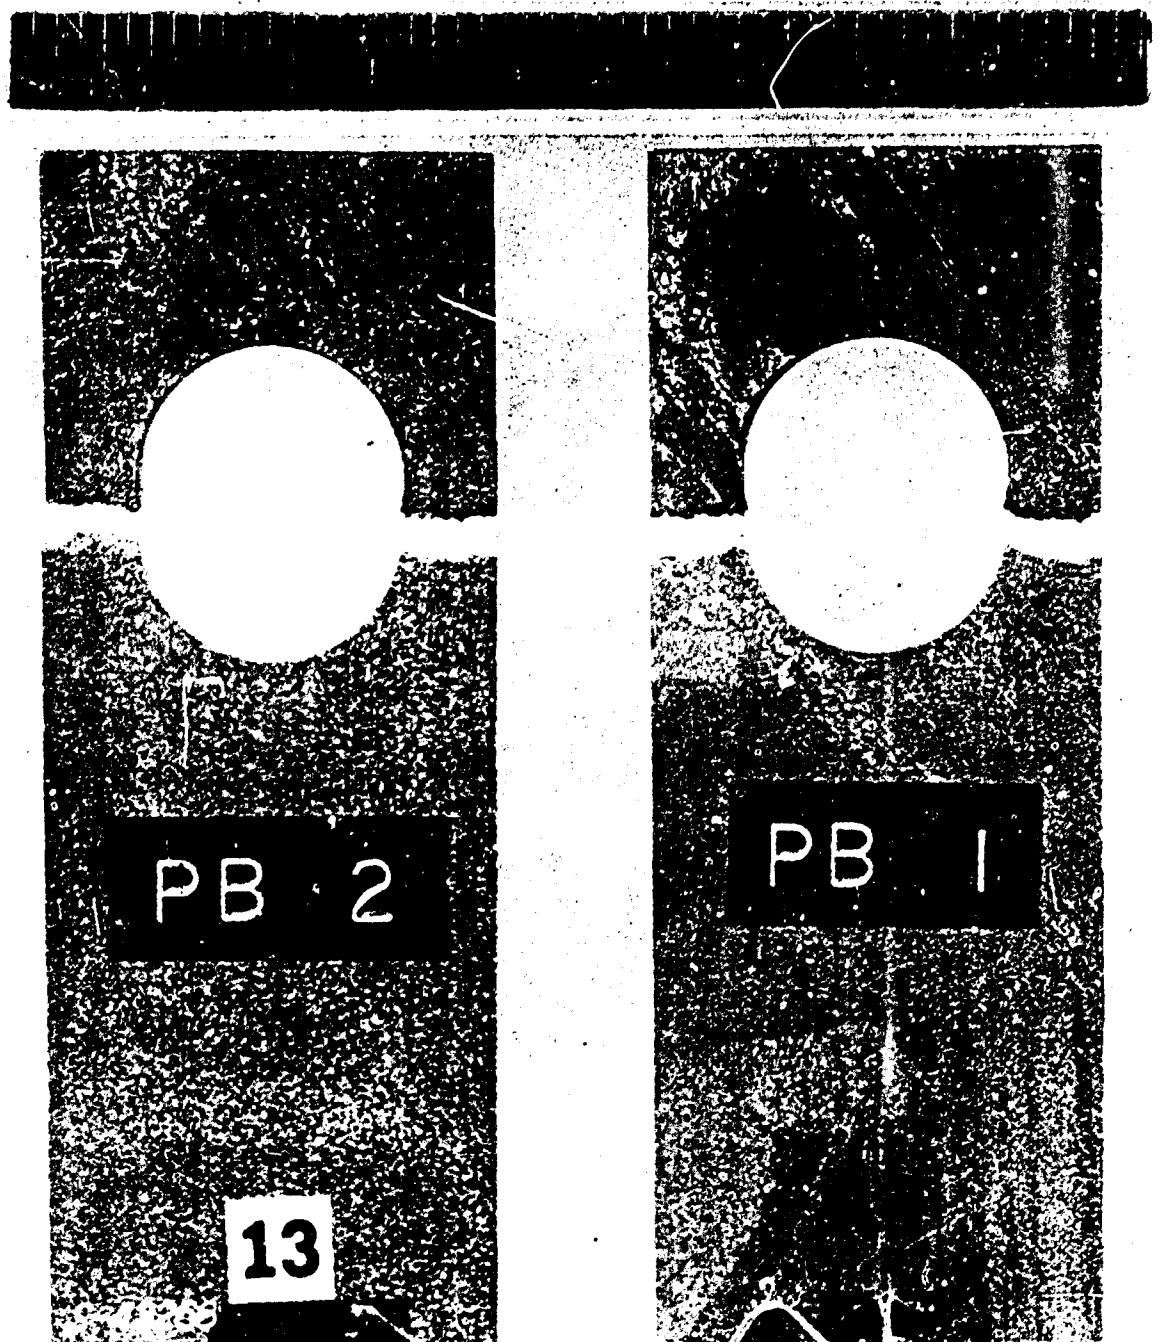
Typical Failure Modes of BORSIC-Aluminum Specimens
